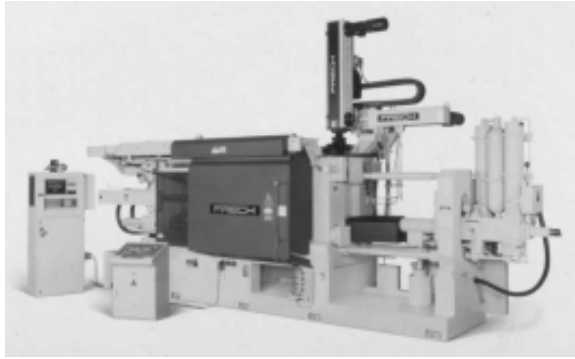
FRECH cold-chamber die-casting machine DAK 500/315 S
